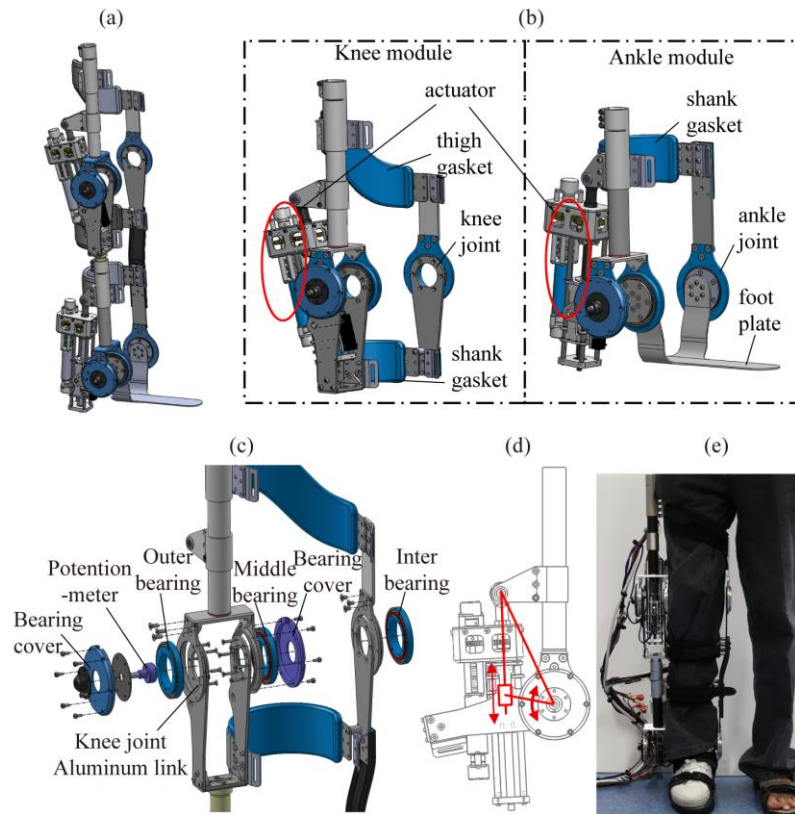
(a) CAD model of the knee-ankle-foot robot; (a) CAD models of the knee module and ankle-foot module; (c) explosive views of the robotic joint; (d) slider-crank linkage as the actuation mechanism; (e) front view of a prototype of the robotic system wore by a subject.
